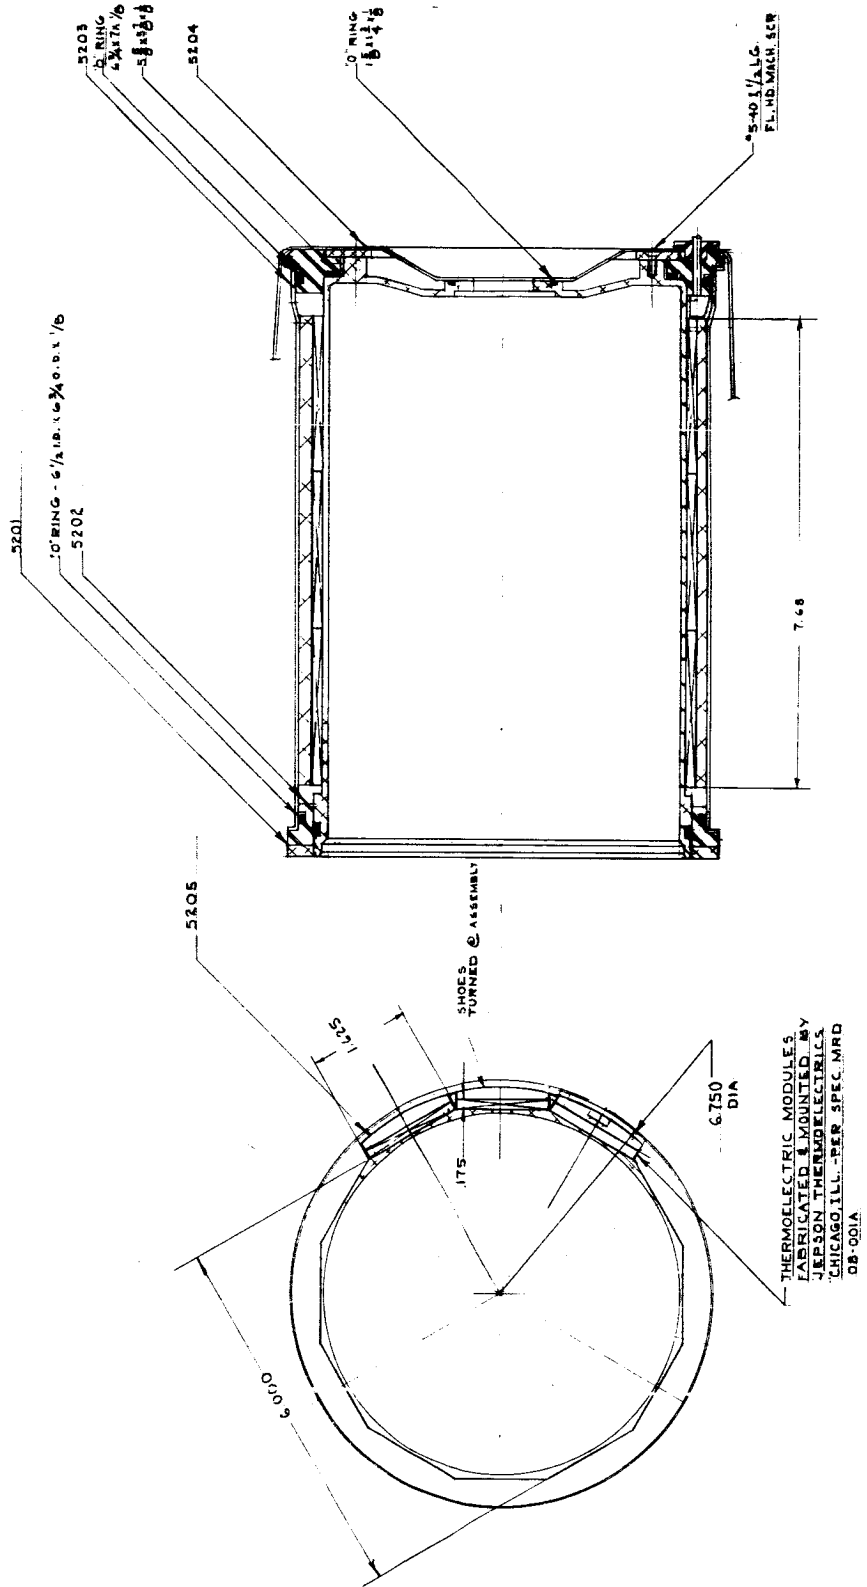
EVAPORATOR ASSEMBLY DRAWING
